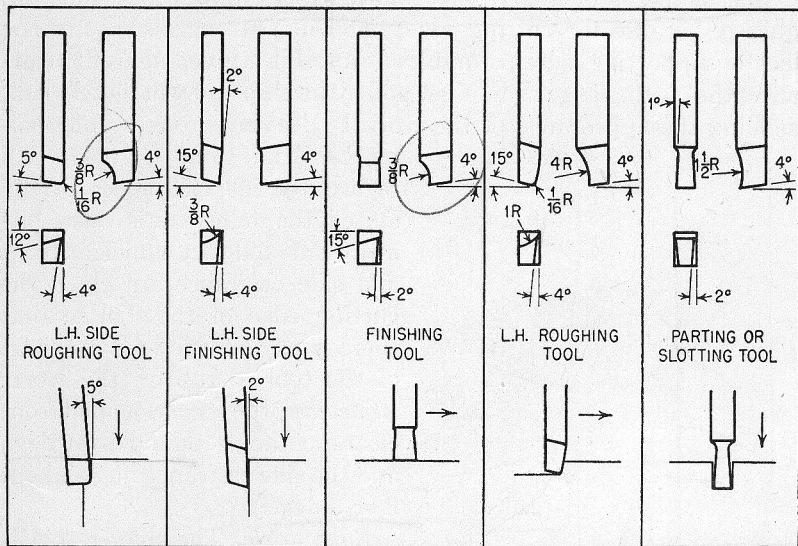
Shaper tools for cutting mild steel. (The Cincinnati Shaper Company)
